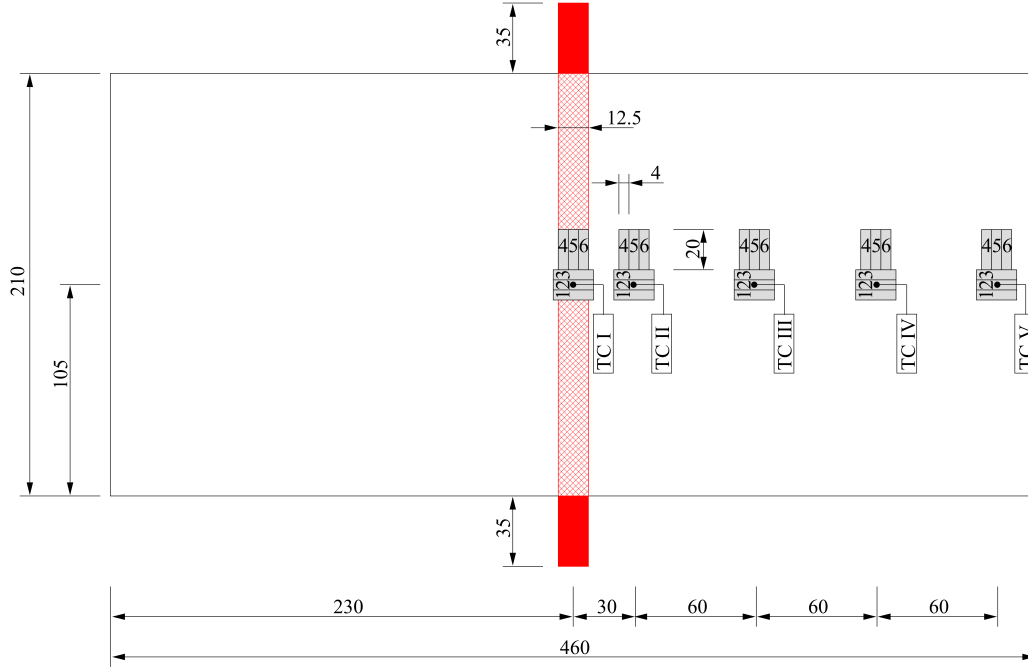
Dimensions of the mesh stripe panel, including the heater mesh (red), the positions of the thermocouples TC I to TC V and the ILSS specimens (grey). Units are in millimetres.
